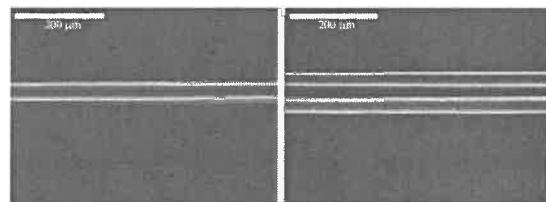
(a) single and (b) double micro-grooves machined by MECM with thin foil electrode.
